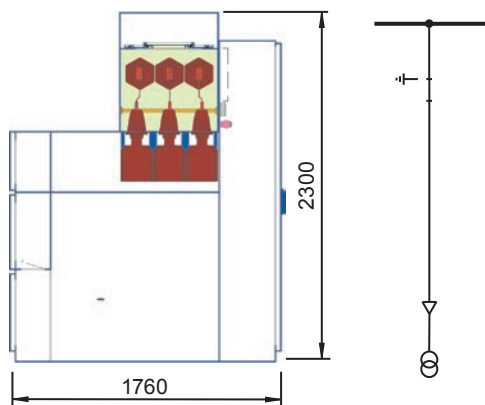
Metering panel (Example: Measurement of the front busbar)
